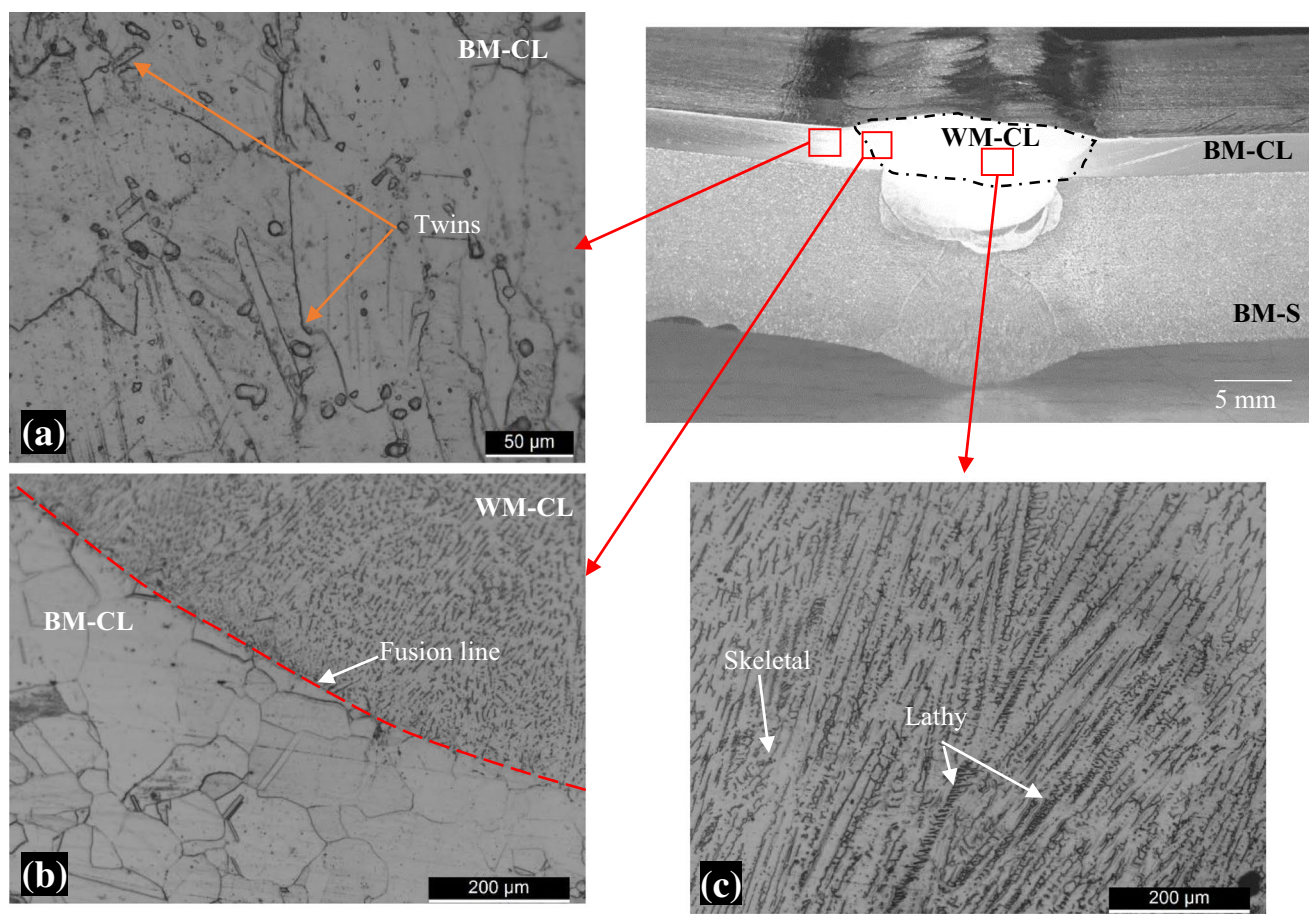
Metallographic examination details of stainless-steel side. (a) Base Metal Clad Layer (b) Fusion line between Base Metal Clad Layer/ Weld Metal Clad Layer (c) Weld Metal Clad Layer
